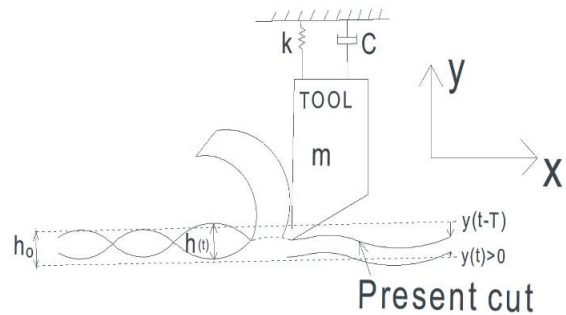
Sketch of the turning process (m – mass of the machining tool)
